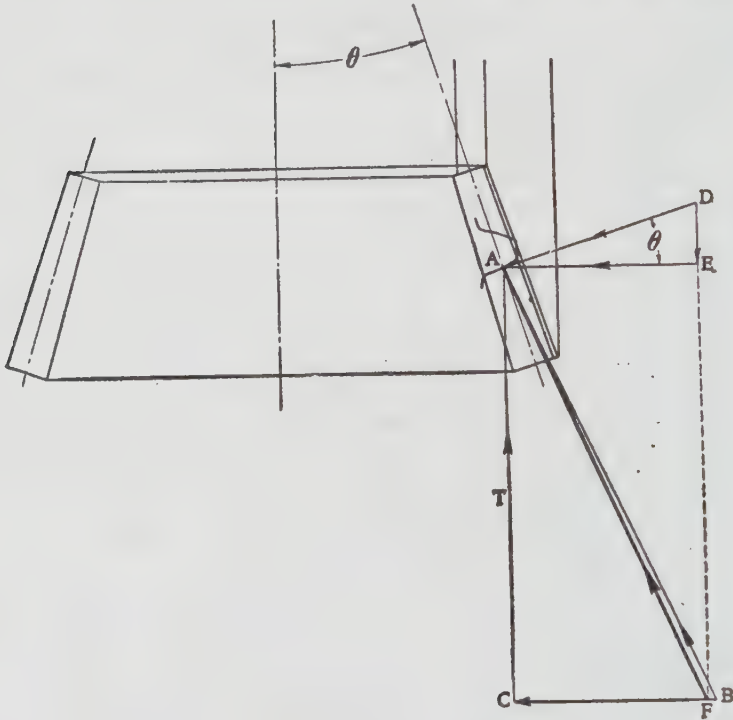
TOOTH REACTION IN BEVEL GEARS.
